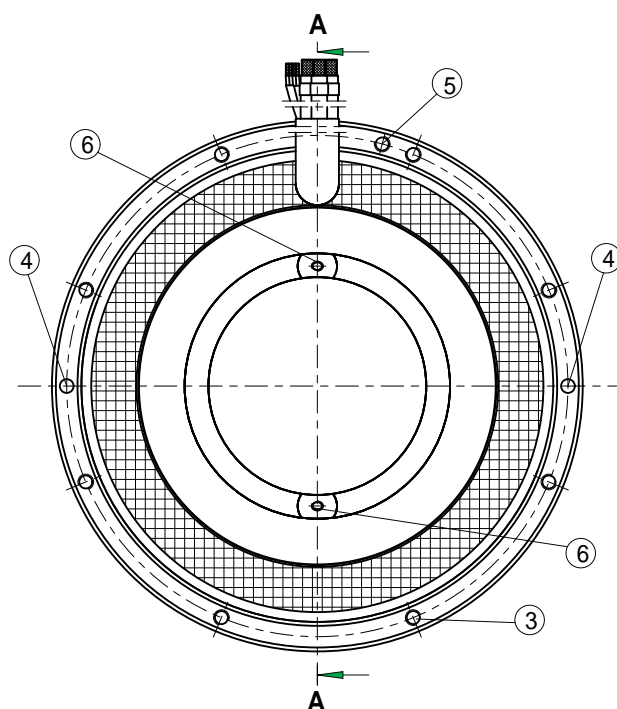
1MB 241 frameless spindle motor - dimensional data (part 1)
